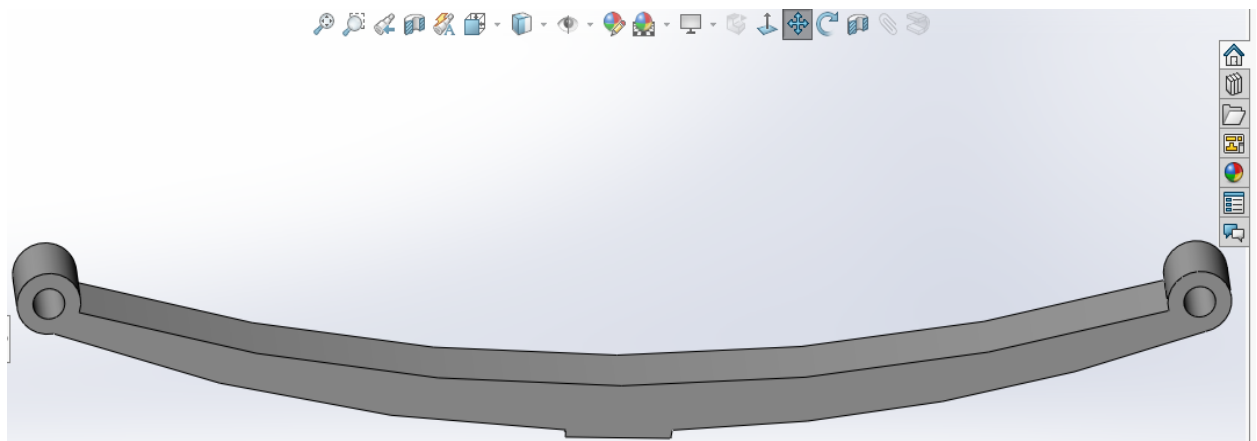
Three-Dimensional Sketch of Composite leaf spring
